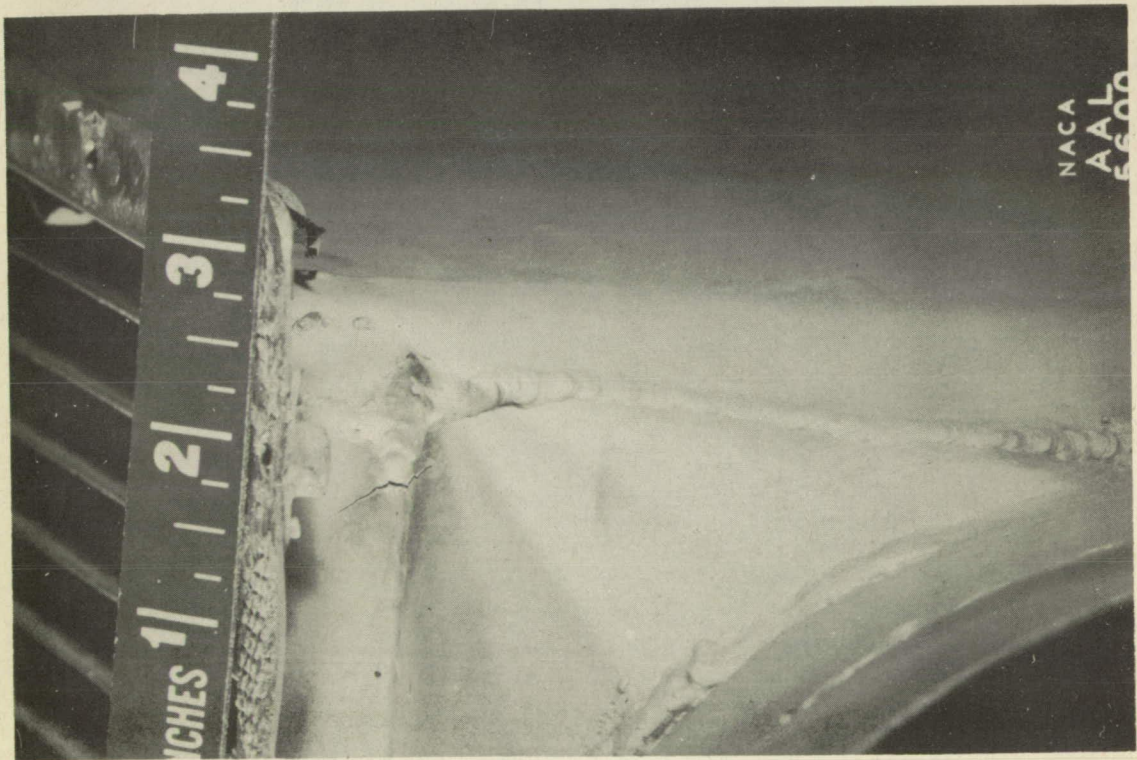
Left inboard heat exchanger after 100 hours of flight testing. Views showing gas-side cracks and shroud crack, C-46 airplane.
